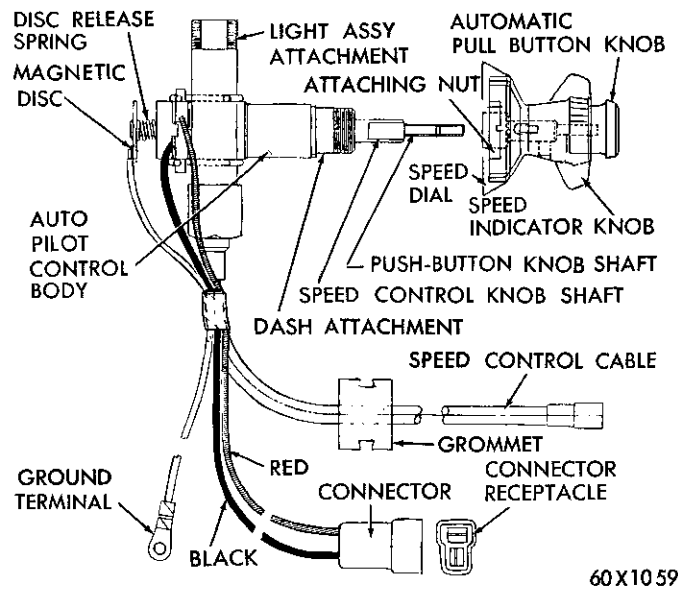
Auto-Pilot Selector Control Assembly (Schematic View)
